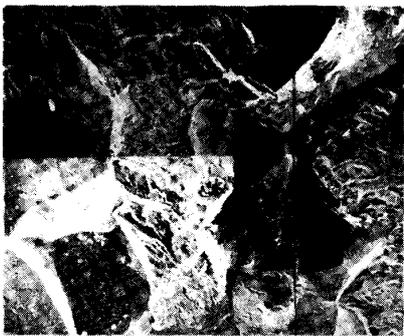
Fractographs of corrosion fatigue specimen (R=0.5, ΔK=40 kgf/mm<sup>3/2</sup>)
